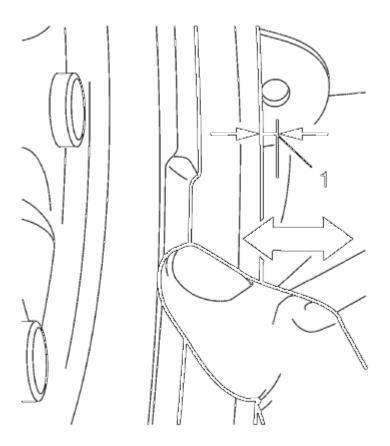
Cleaning Lower Crankcase Engine Block Side With Suitable Tool Courtesy of GENERAL MOTORS COMPANY
